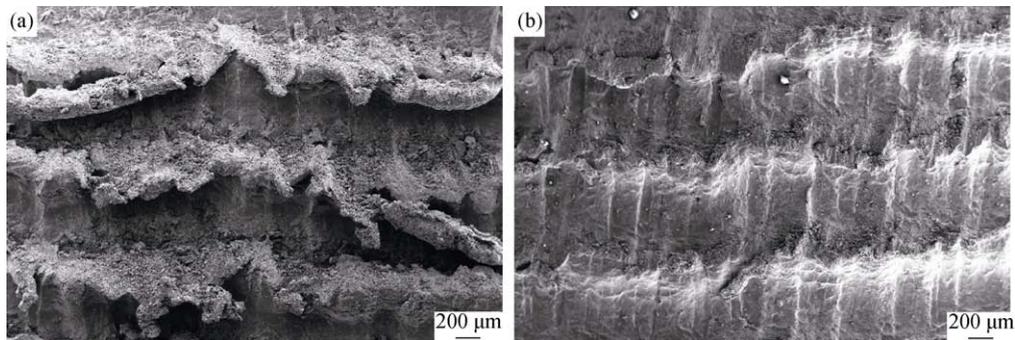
SEM micrographs of the fracture surface of the explosive clad plate: (a) low carbon steel; (b) CP-Ti.
